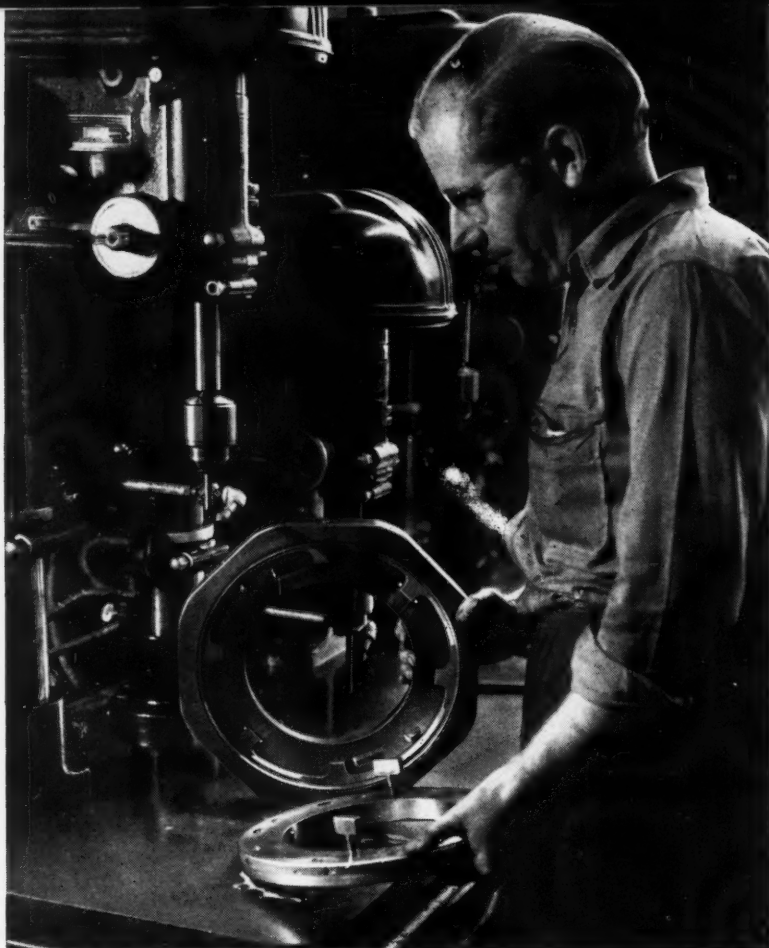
This jig locates and clamps the work for drilling eight equally spaced holes around the periphery and six holes in the lugs
